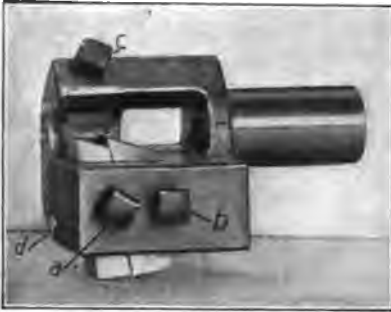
Standard Box-tool made by the Brown & Sharpe Mfg. Co.
